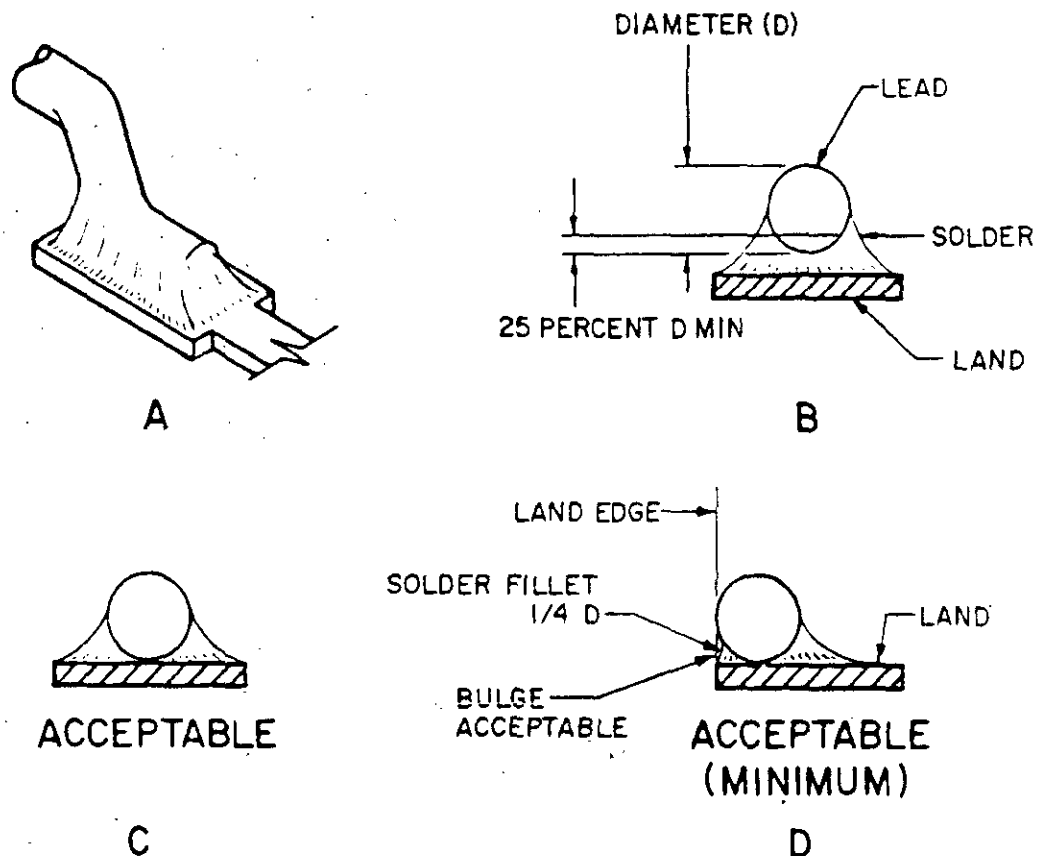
Planar mounted device round or coined lead solder fillet (see 5.7.10).
